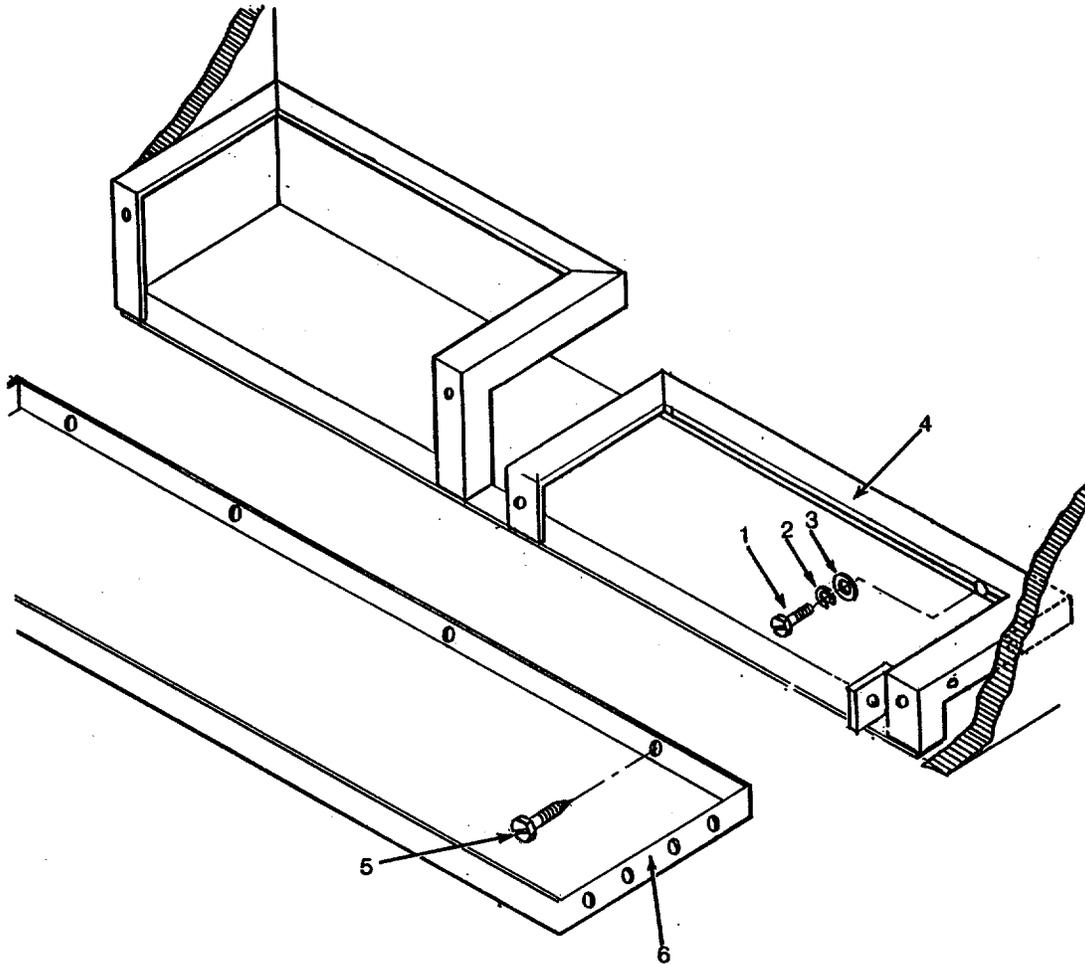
Air Conditioner Mounting Bracket Assembly (24,000 BTUH and 36,000 BTUH)
